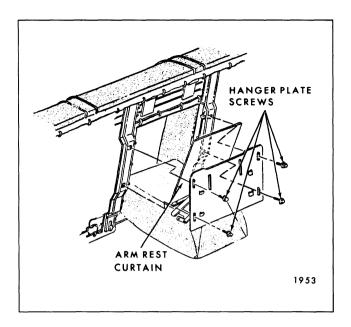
Rear Seat Back Arm Rest and Hanger Plate
